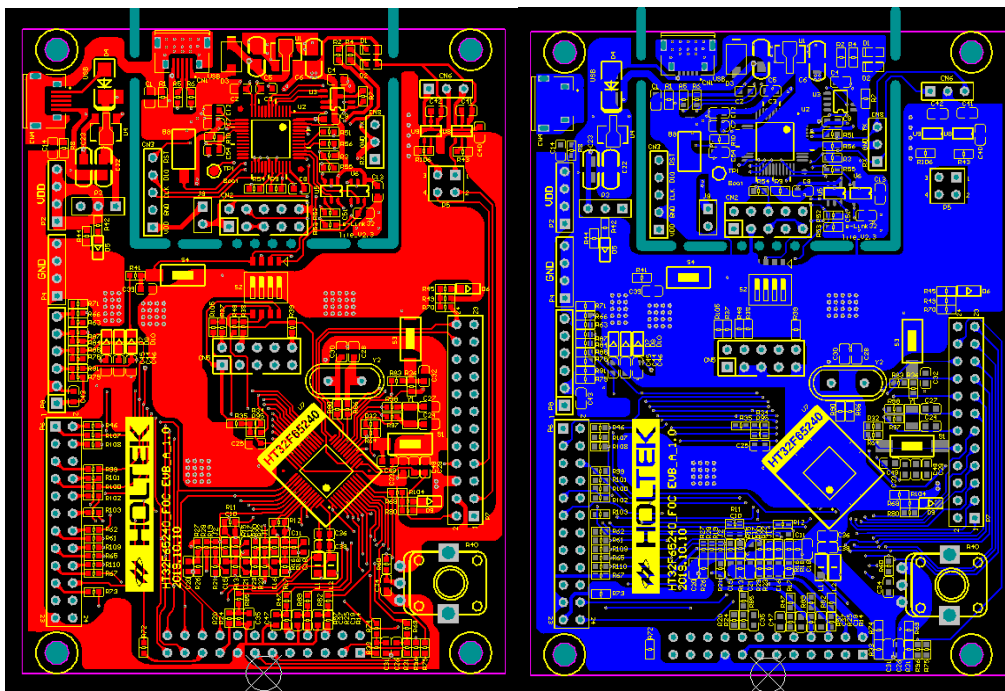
BLDC Motor Workshop FOC-EVB PCB Layout: (a) Upper Layer; (b) Lower Layer
